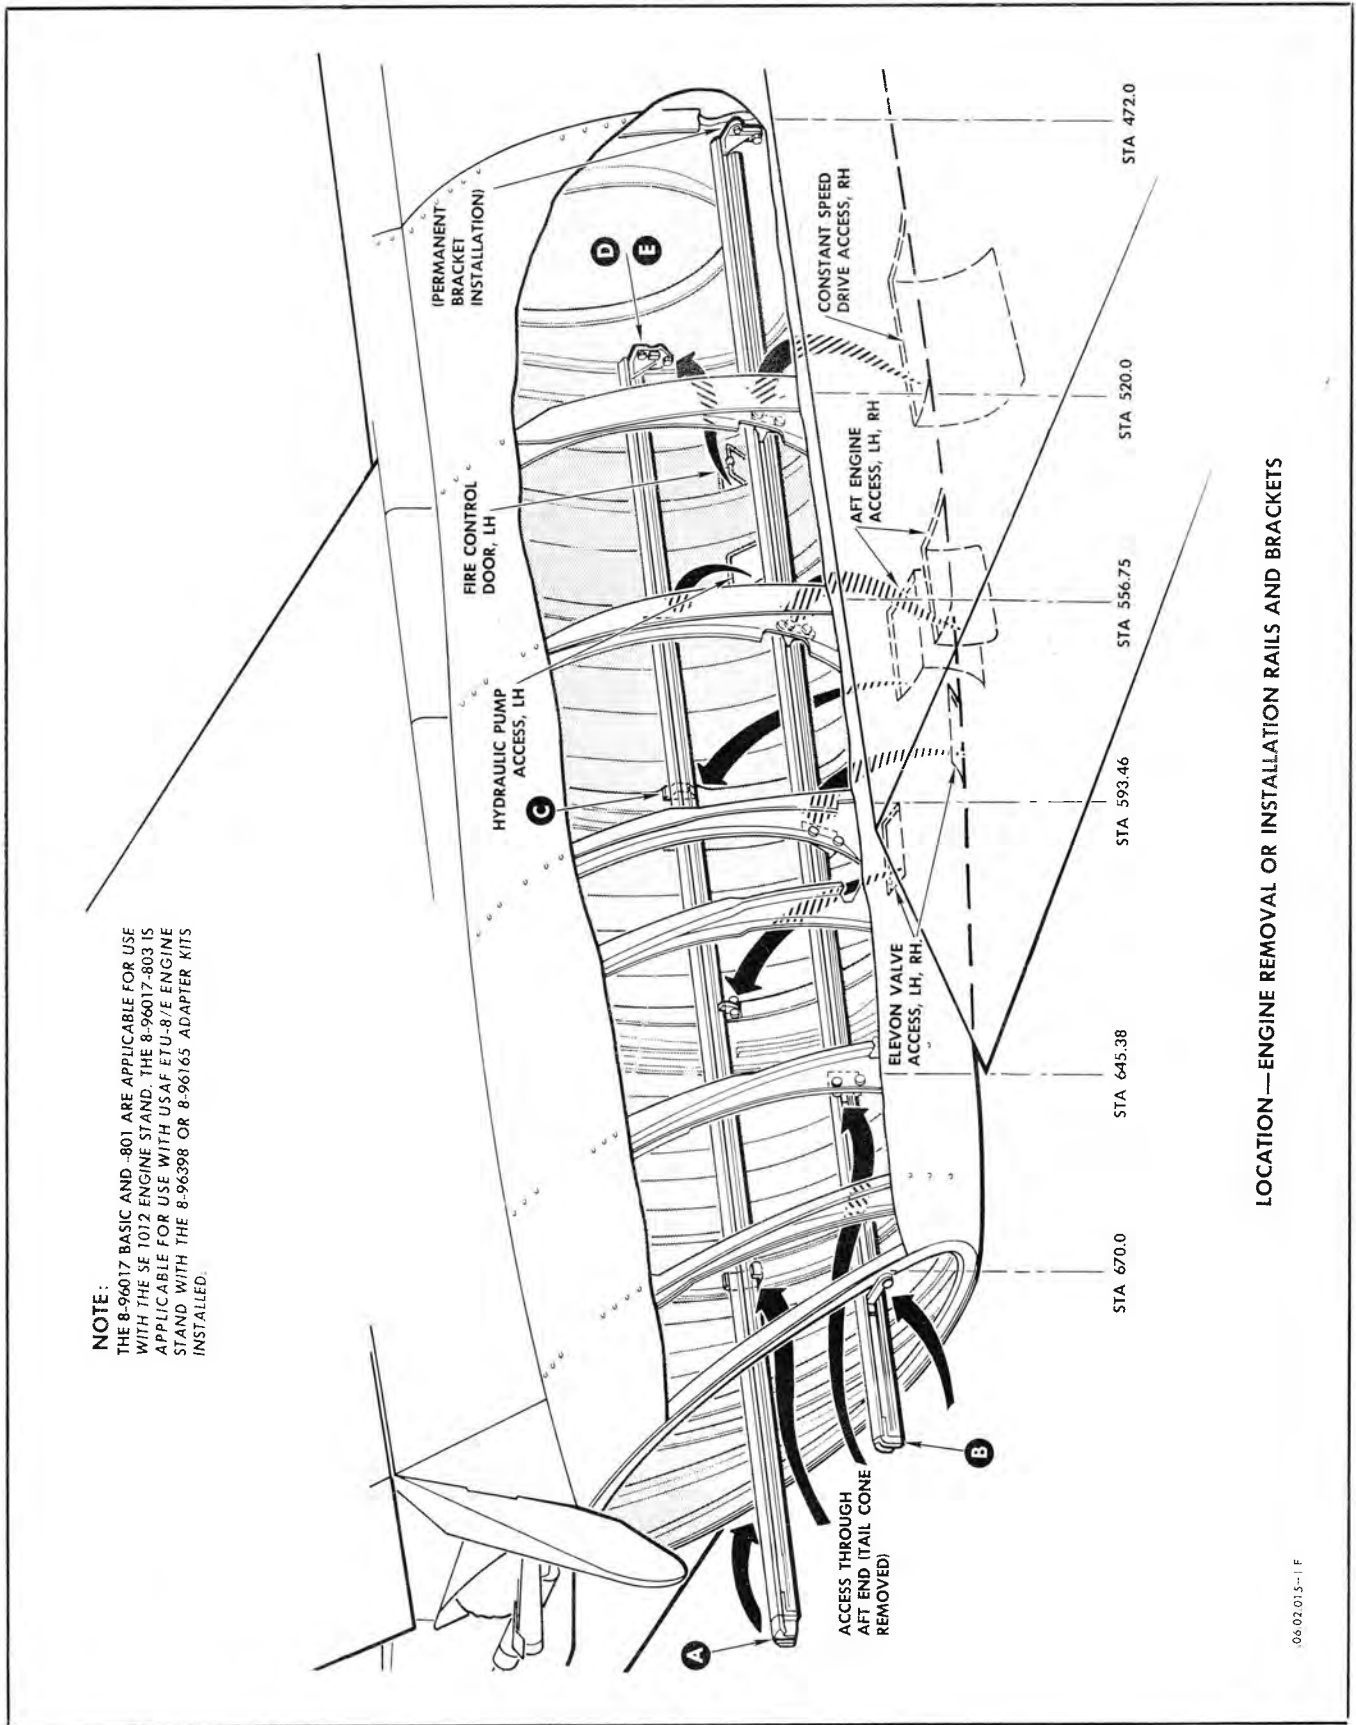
Engine Replacement, Rail and Bracket Installation, 8-96017 Basic, -801, -803 (Sheet 1 of 2)
